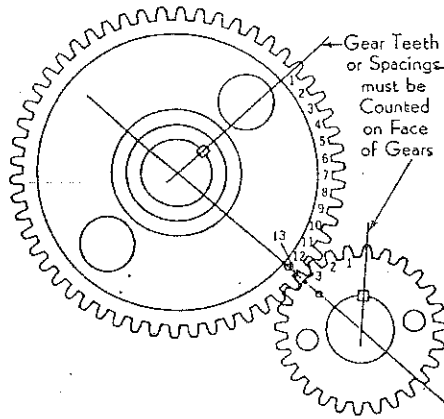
Valve timing on 228, 236, 248, 256 and 270 engines
